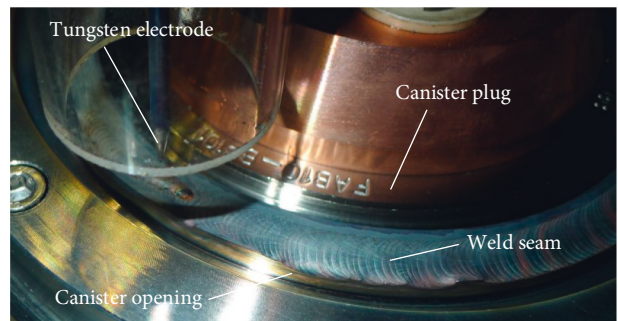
Close-up of the welding torch and the seam during testing.
